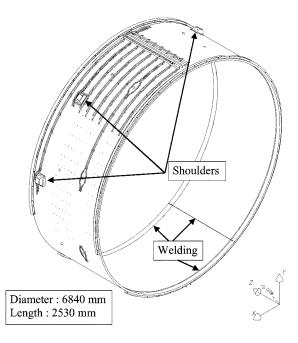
Module of the external cylinder. Each module is composed of three elements: a shell, two end flanges, and shoulders for the tie-rods.
